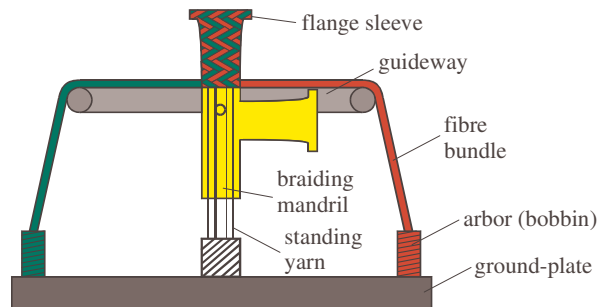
Schematic diagram of the braiding machines to manufacture T-piping
